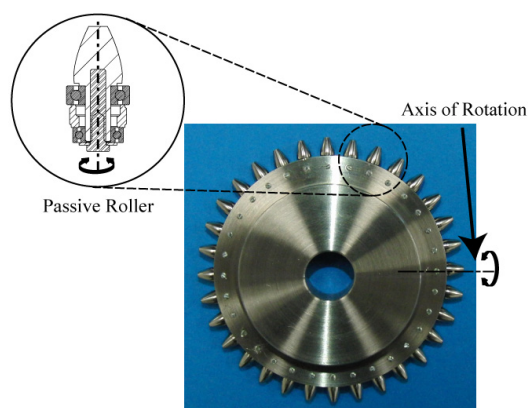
Gear with conical passive rollers and sectional view of the roller unit
